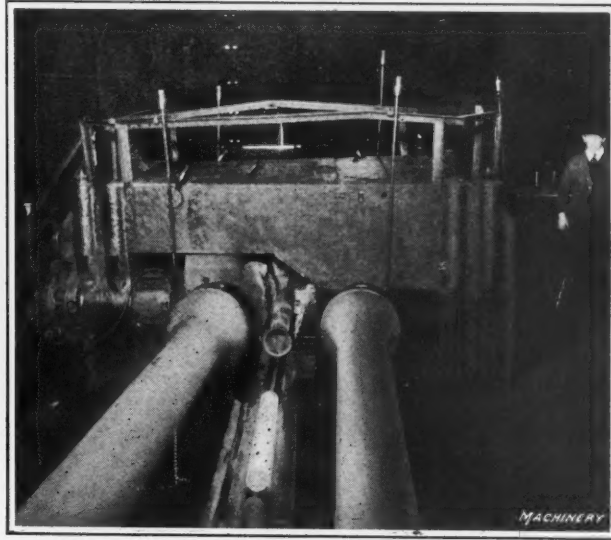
A Heated Billet entering the Piercing Mill where the Centered End is forced over the Piercing Point of a Mandrel
